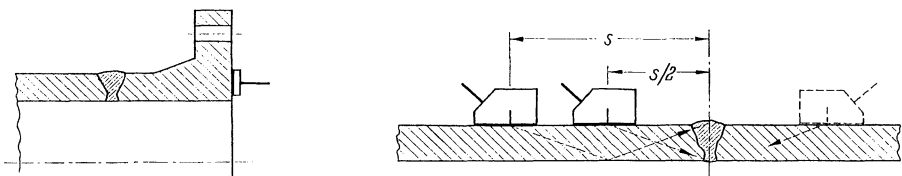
Testing a circumferential pipe weld from the welded-on flange
